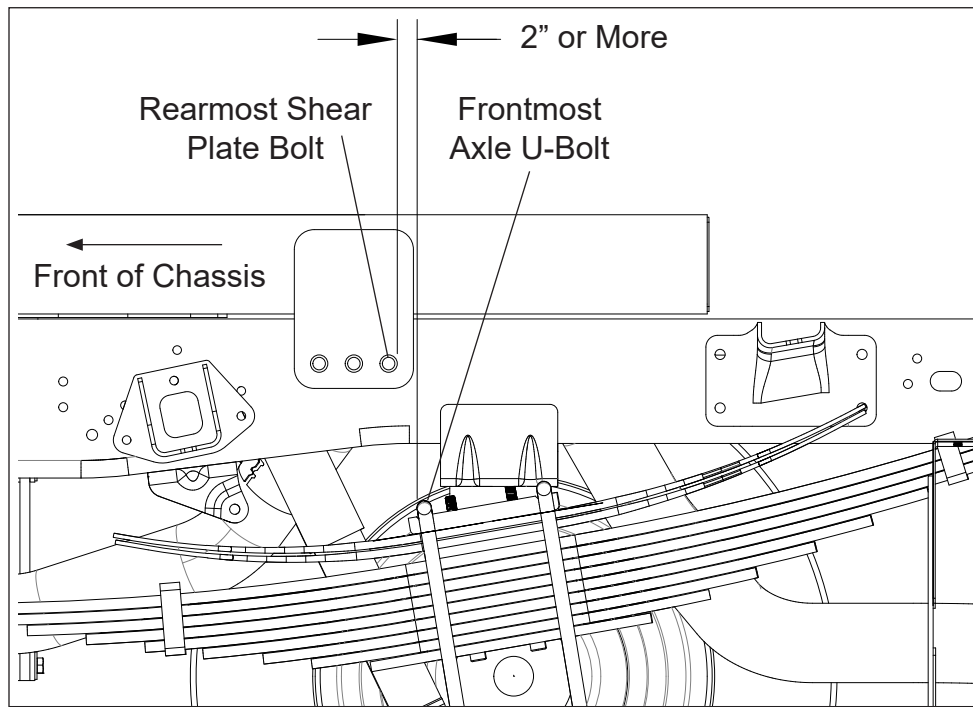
Shear Plate Bolts Located Above Axle U-Bolts
